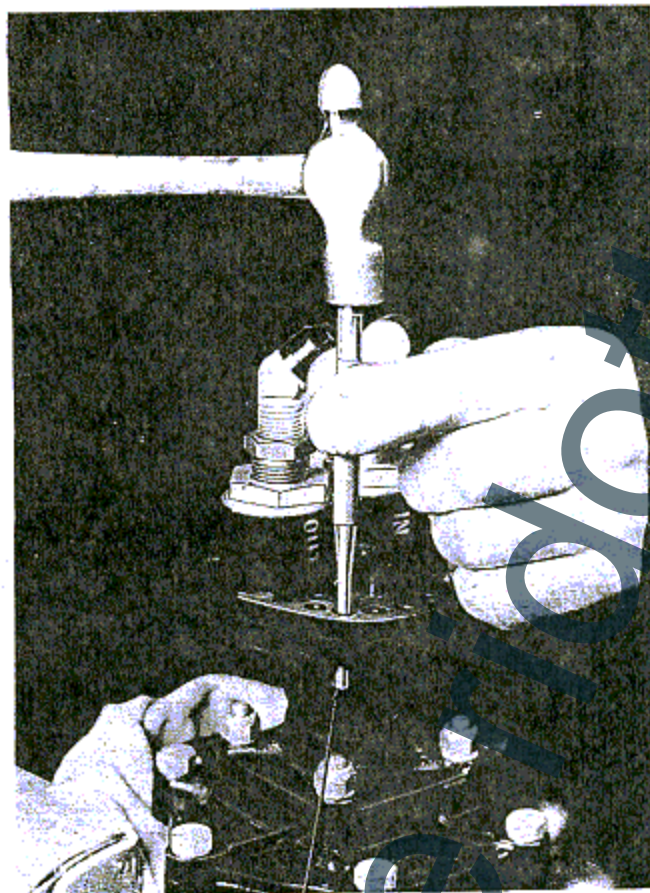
Removing Bolts to Separate Hydraulic Pump Unit
